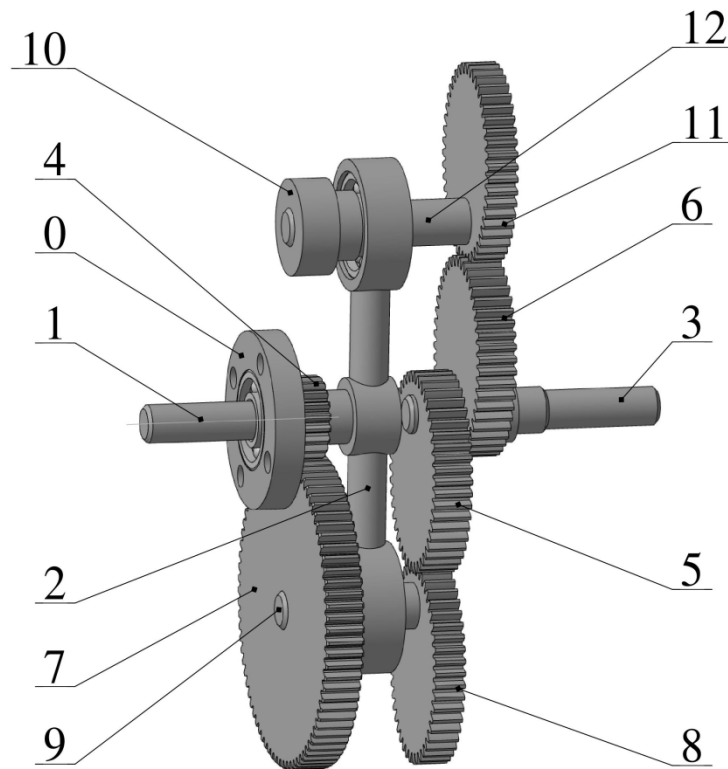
Intermittent motion planetary mechanism with elliptical gears.
